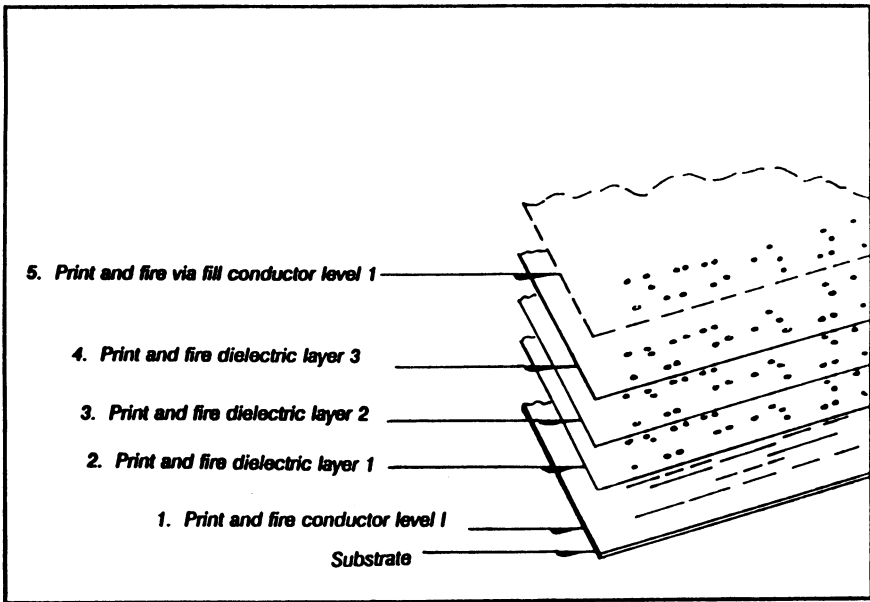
Exploded view of a fabrication sequence for single level of a thick film multilayer.
